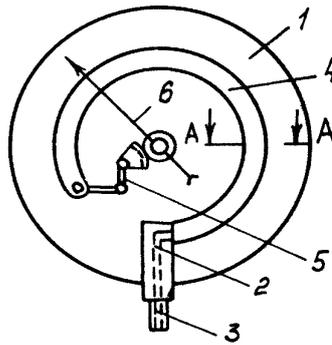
Schematic diagram of a manometer with a tubular spring
